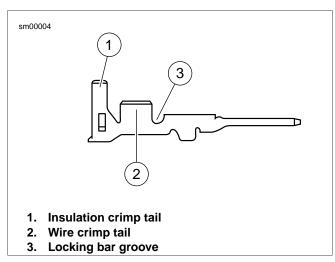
Tyco 070 Multilock Unsealed Connector: Pin Terminal
